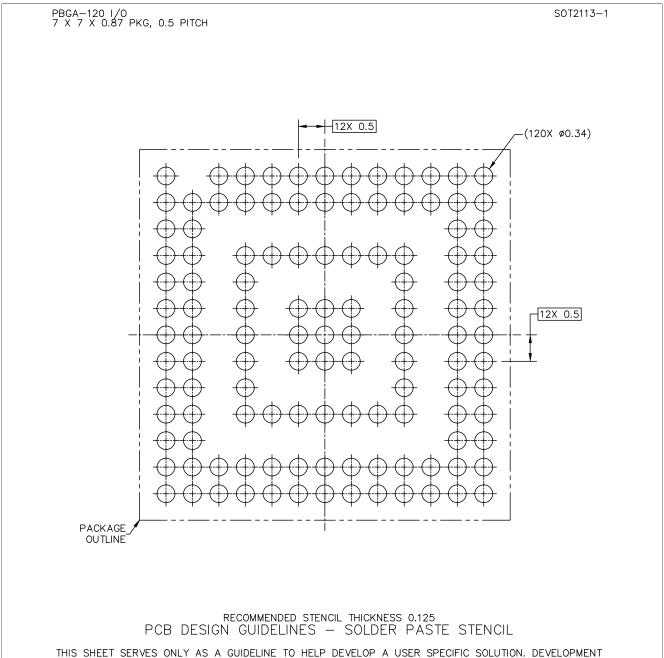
Reflow soldering footprint part2 for VFBGA120 (SOT2113-1)
